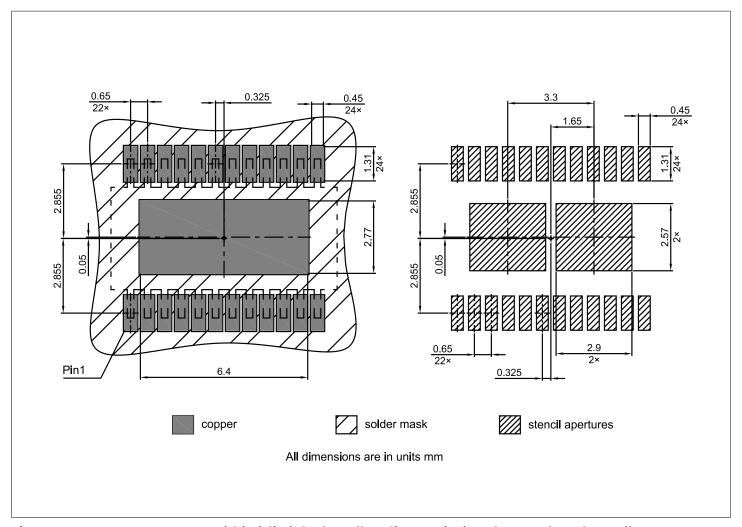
PG-TSDSO-24 (thin (slim) dual small outline 24 pins) package pads and stencil
